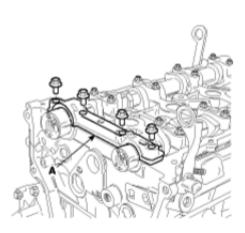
Identifying Front Cam Shaft Bearing Cap Courtesy of HYUNDAI MOTOR CO.
